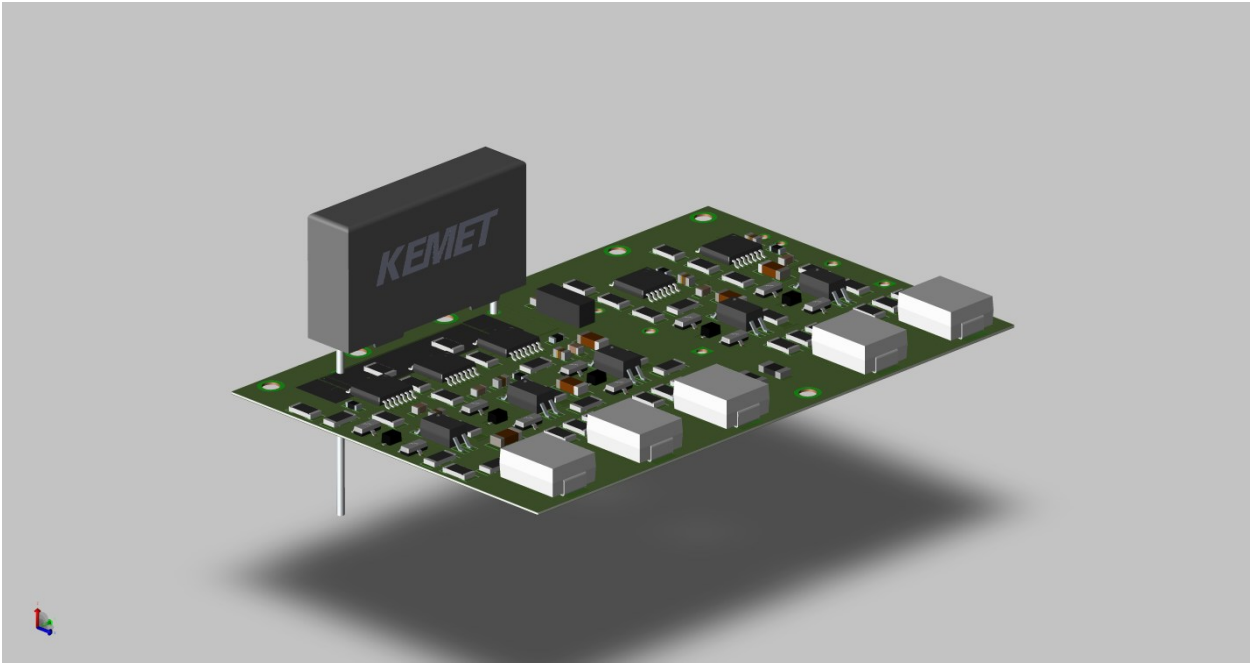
Isometric top 3D view for PCB assembled board.
